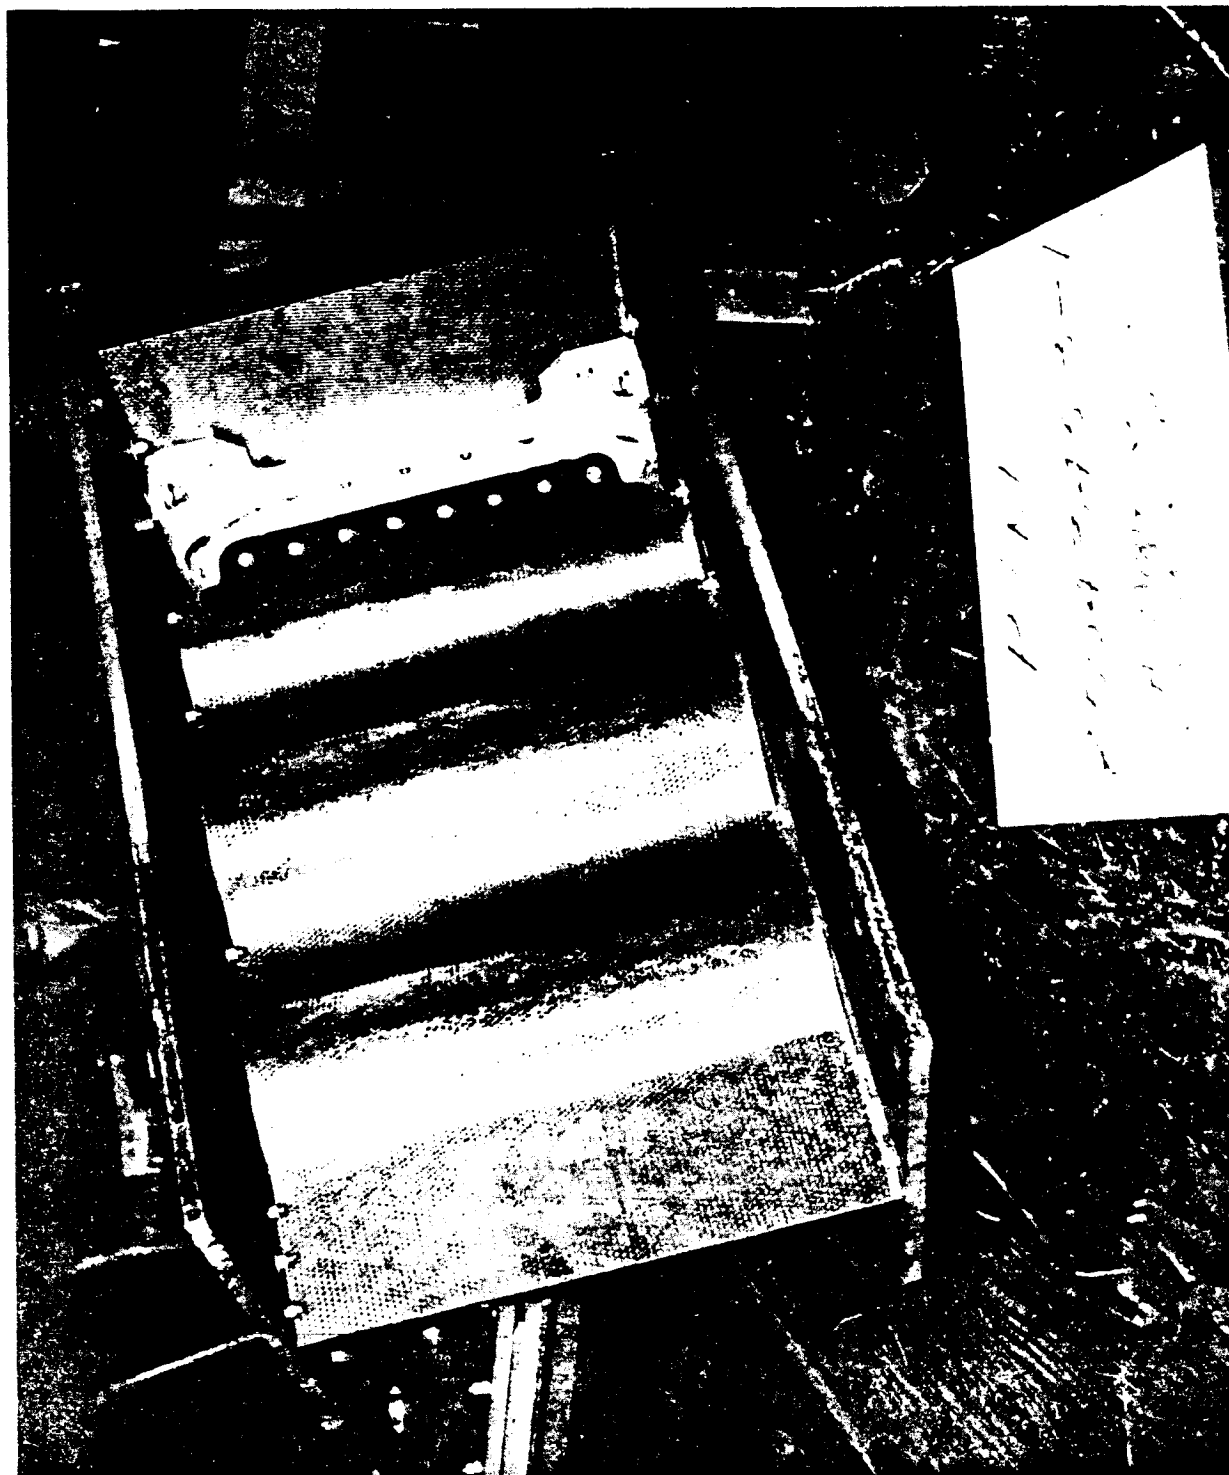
Z5943453-1 ACTUATOR HINGE RIB COMPONENT - VIEW SHOWING INTERNAL FITTING AND
